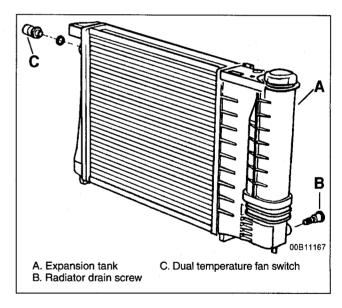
Radiator assembly with integral expansion tank (4-cylinder engine).
